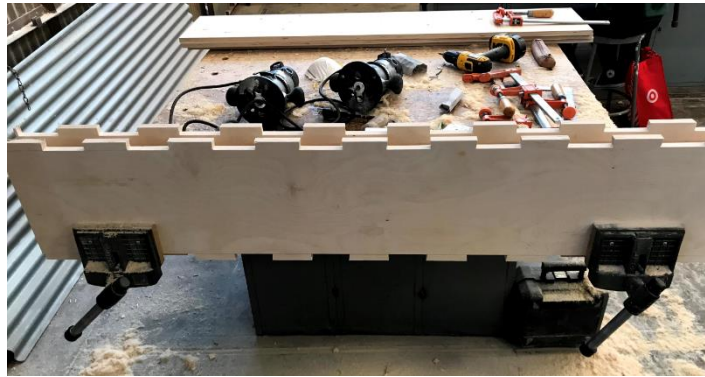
Final result after removing dovetail jig. Dovetail offset is clearly visual.
